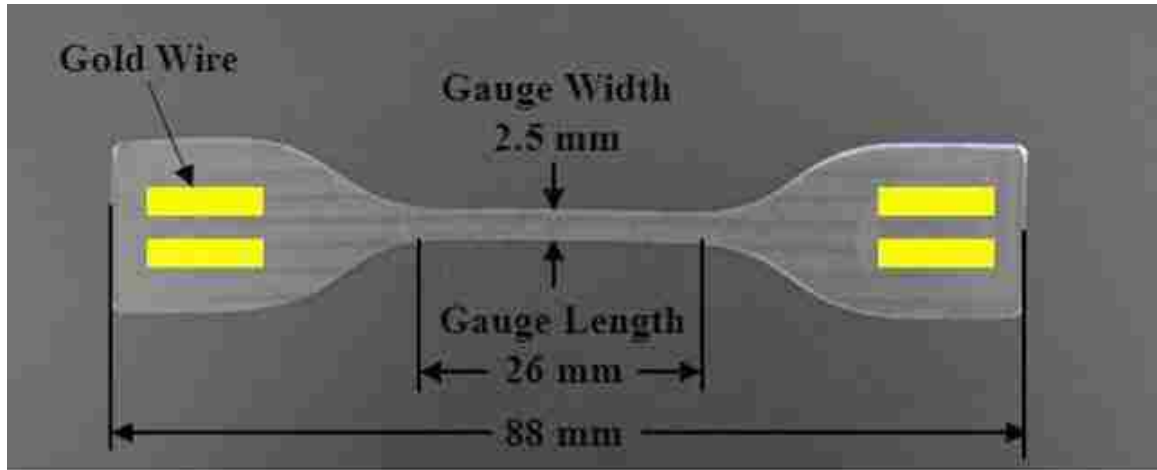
Dogbone sample and dimensions used for stamping PDMS.
